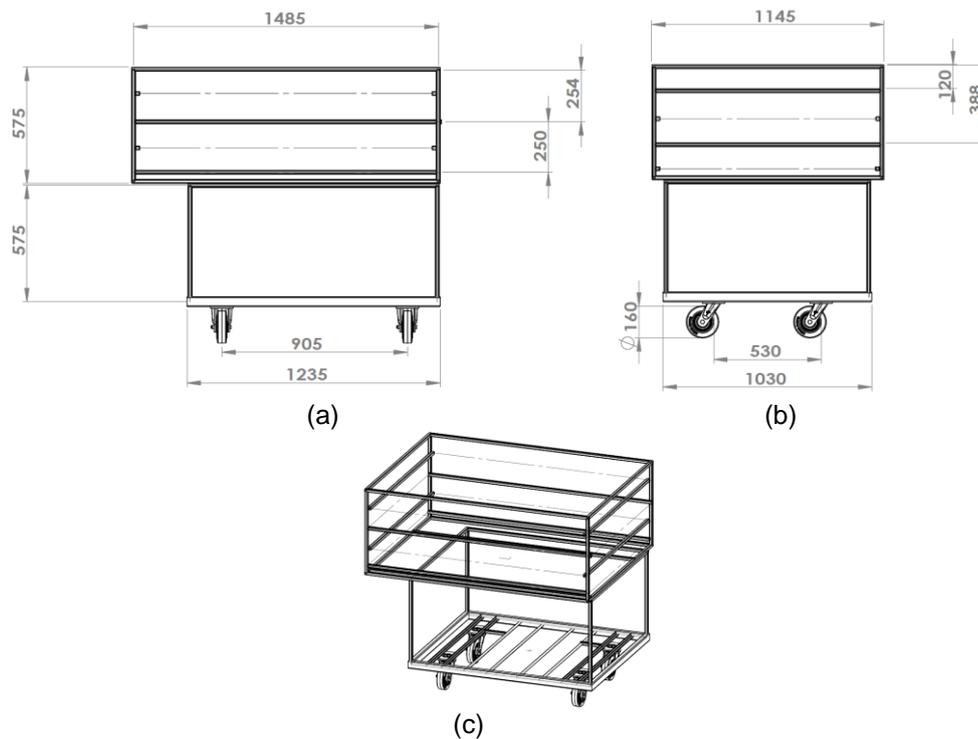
Mechanical structure drawing (a) Front view, (b) Side view, (c) 3D view
